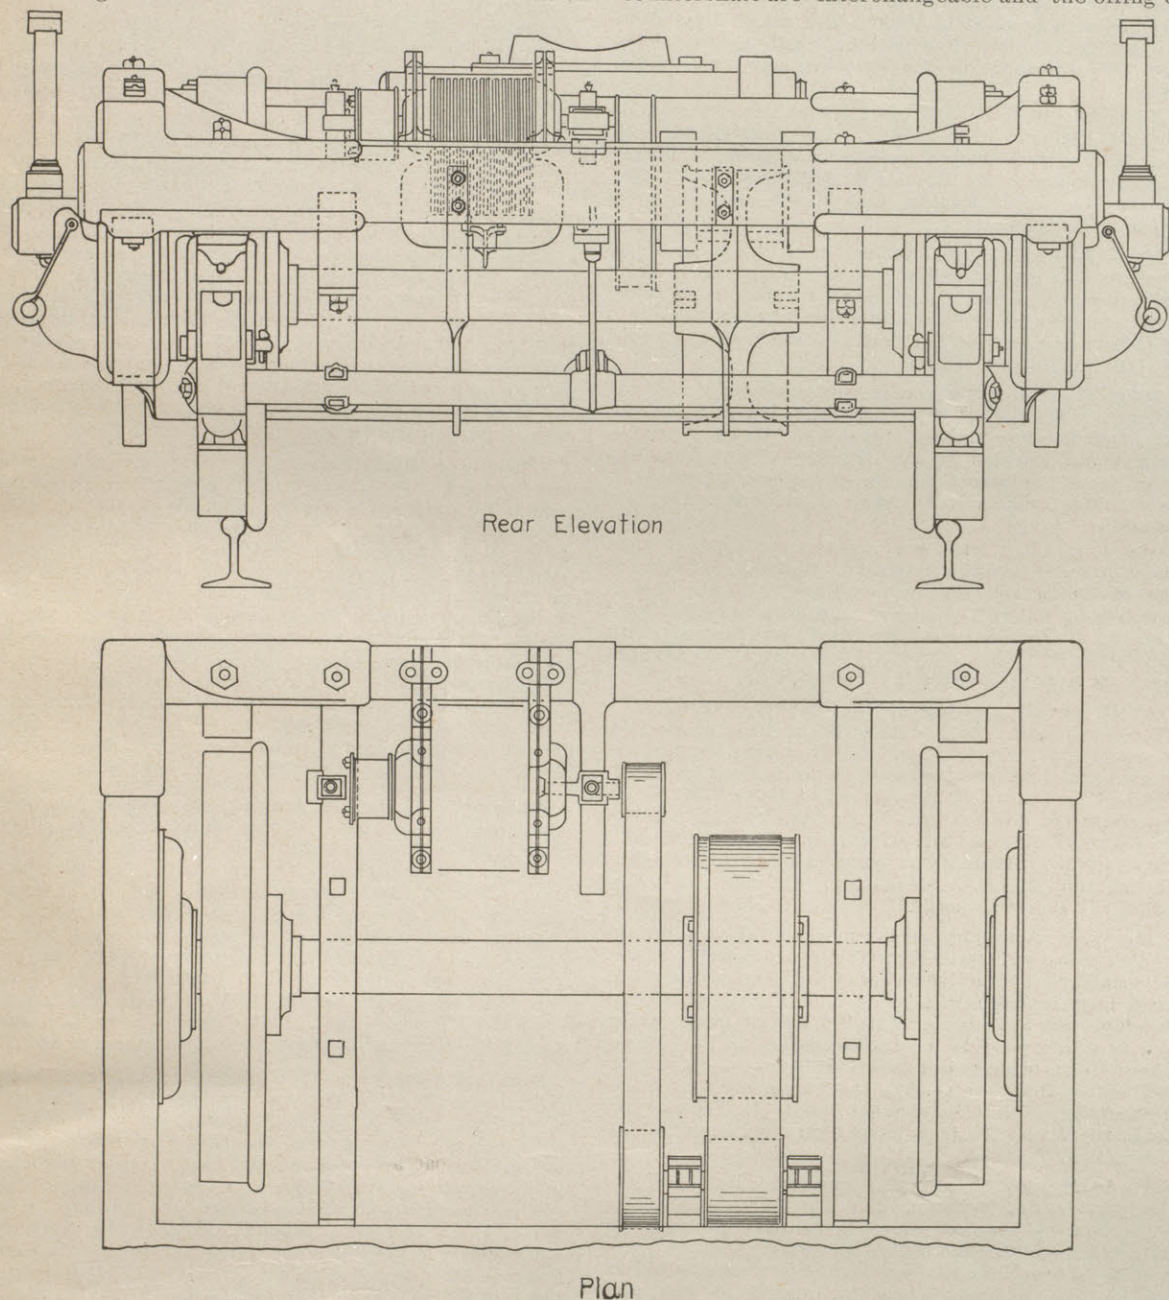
HALF PLAN AND REAR ELEVATION OF TRUCK SHOWING DYNAMO.
